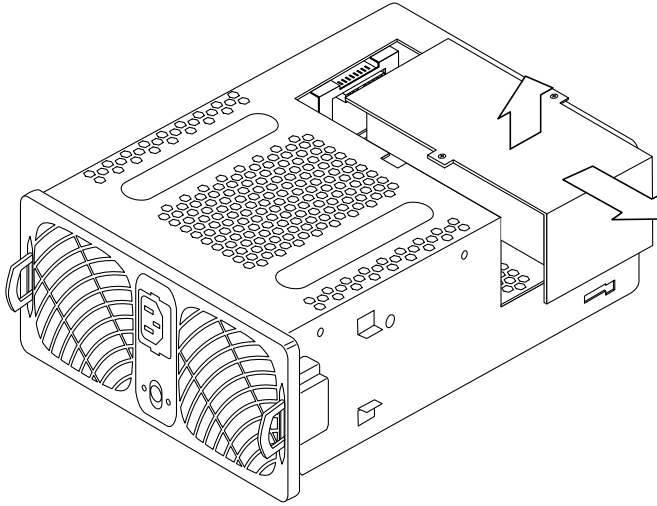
Lifting the PCU Bottom Panel and Battery Slightly Away from the Unit
